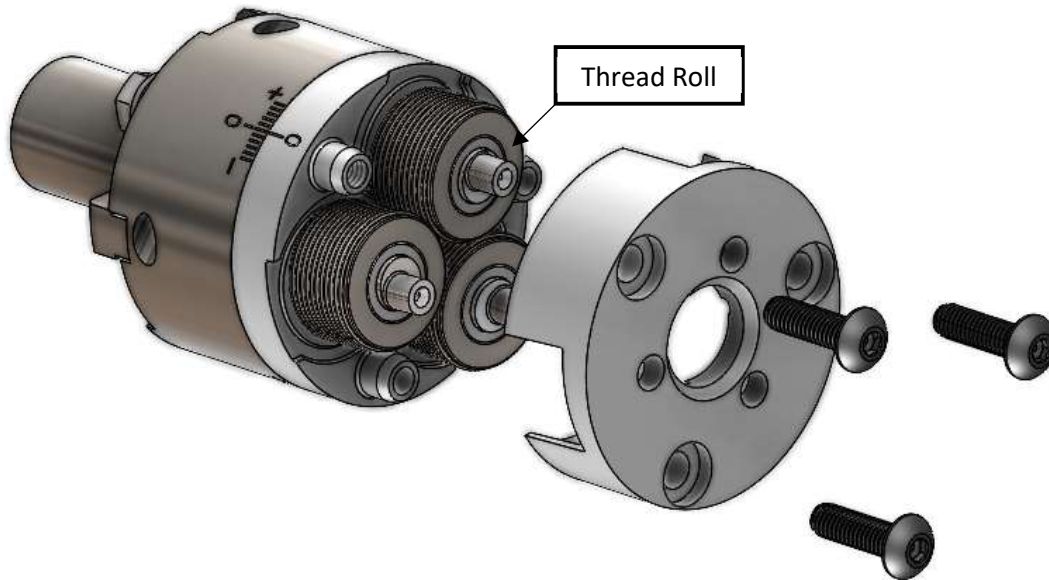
189 ER-01 Attachment with Thread Rolls Installed
